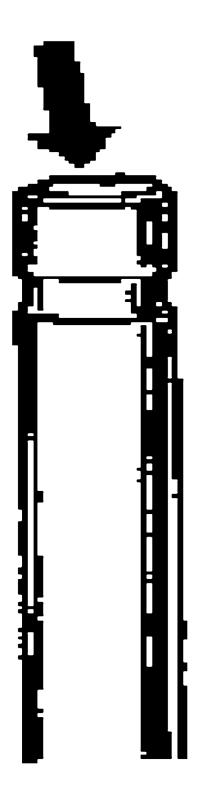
Inspecting Valve Stem End Face Courtesy of SUZUKI OF AMERICA CORP.
